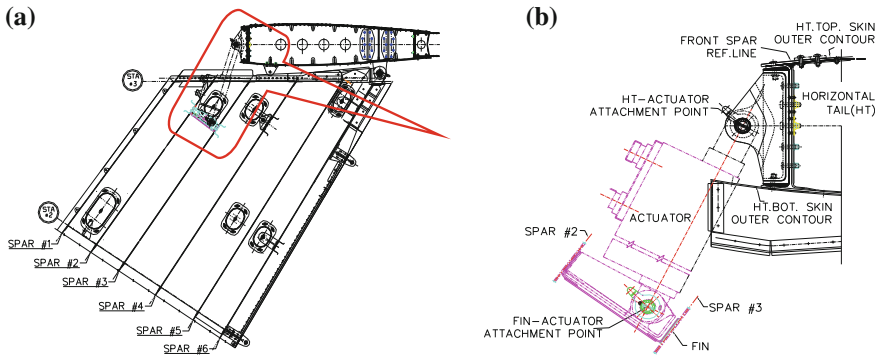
a Actuator installation on HT and fin; b detail view of the attachment
